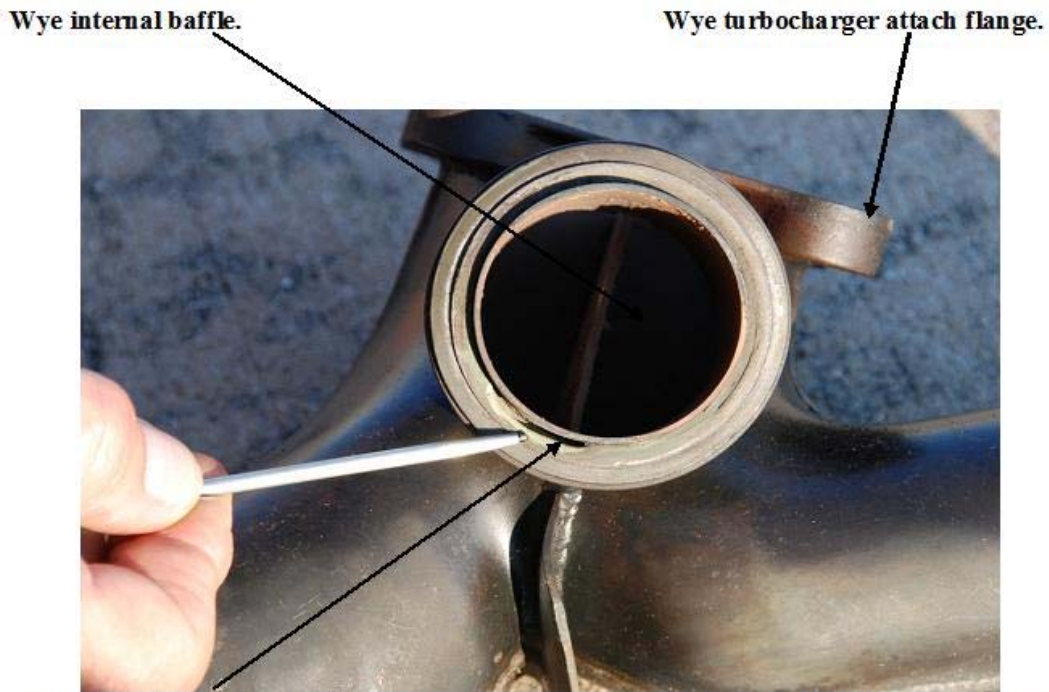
3° deflection of the wye waste-gate attach flange due to preloaded installation and subsequent fatigue failure.
